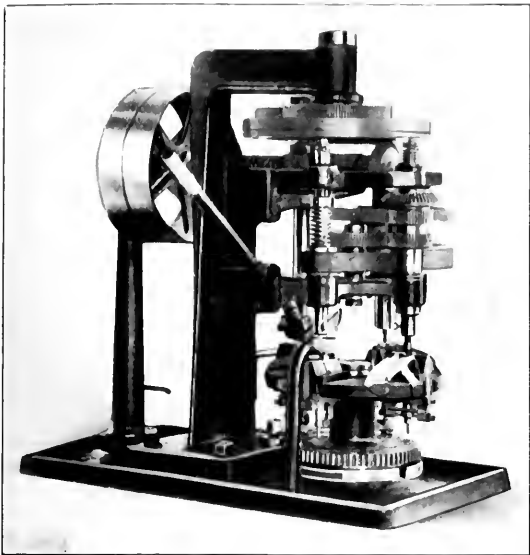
The Pendant Drilling, Counterboring and Tapping Machine
